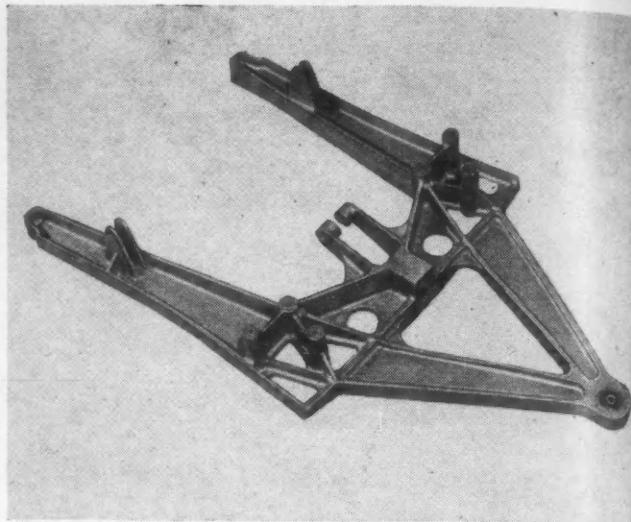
This part, used in the tail fin assembly of the B-29, is illustrative of the cost saving achieved with precision sand casting technique. Use of this method eliminated machining operations and resulted in a saving of \$160 per unit. Total overall distance from the feet of the casting to the center of the bearing is approximately 36 in.
